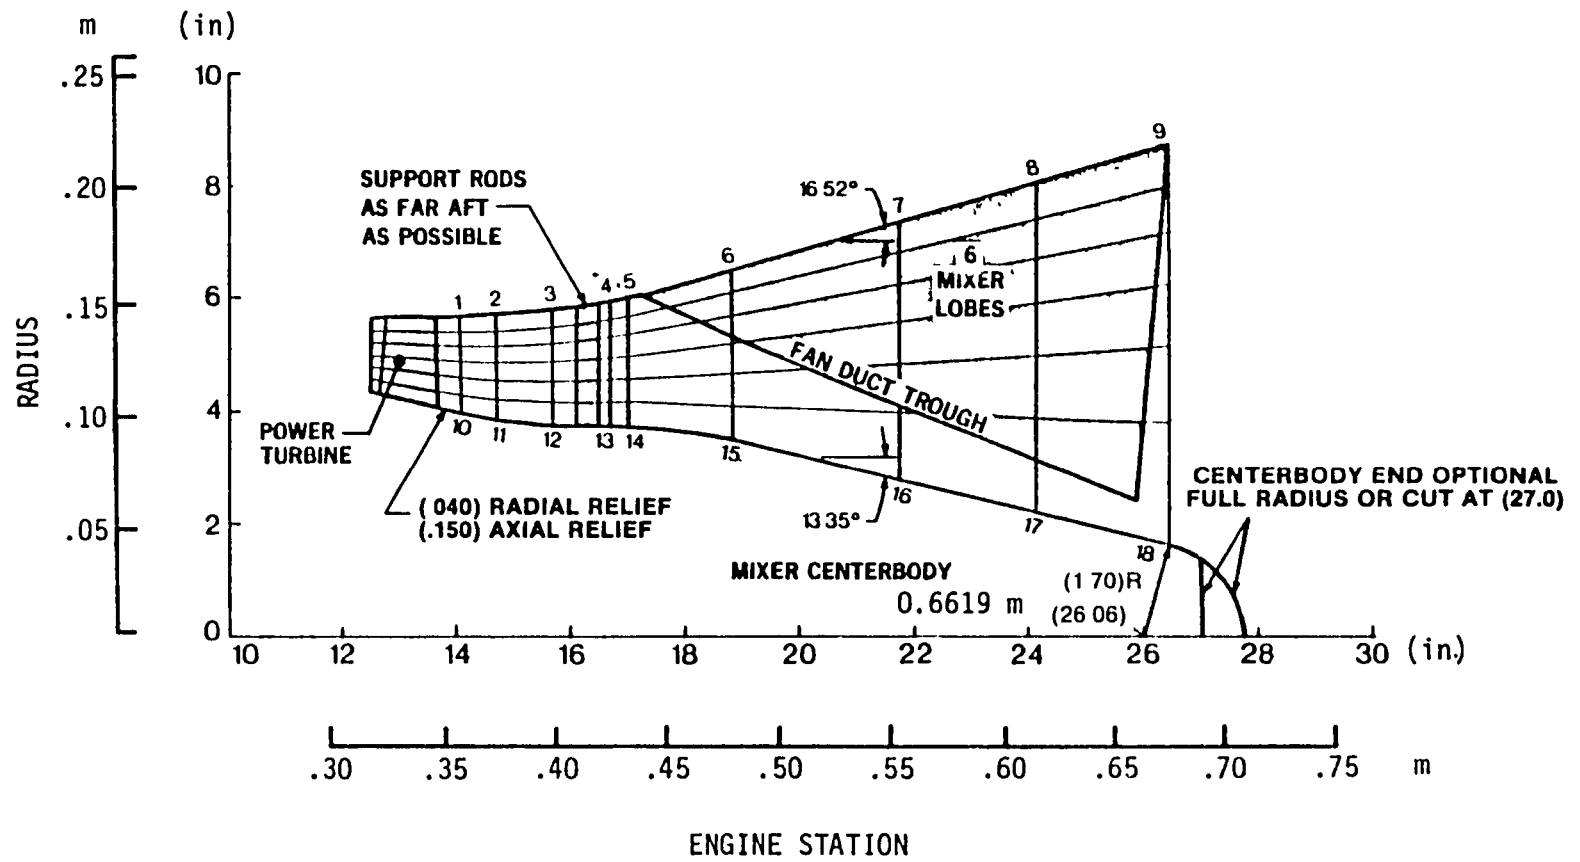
Core Engine Mixer Nozzle Geometric Definition.
